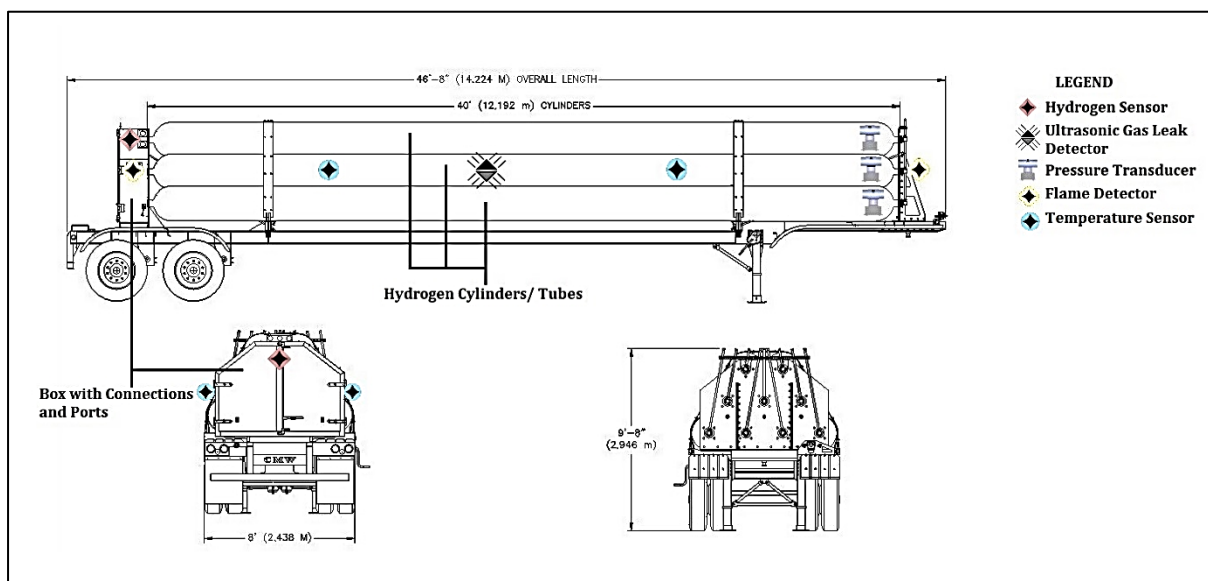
Schematic of the recommended sensor system in a roofless tube trailer [adapted from (City Machine and Welding, 2022)]
